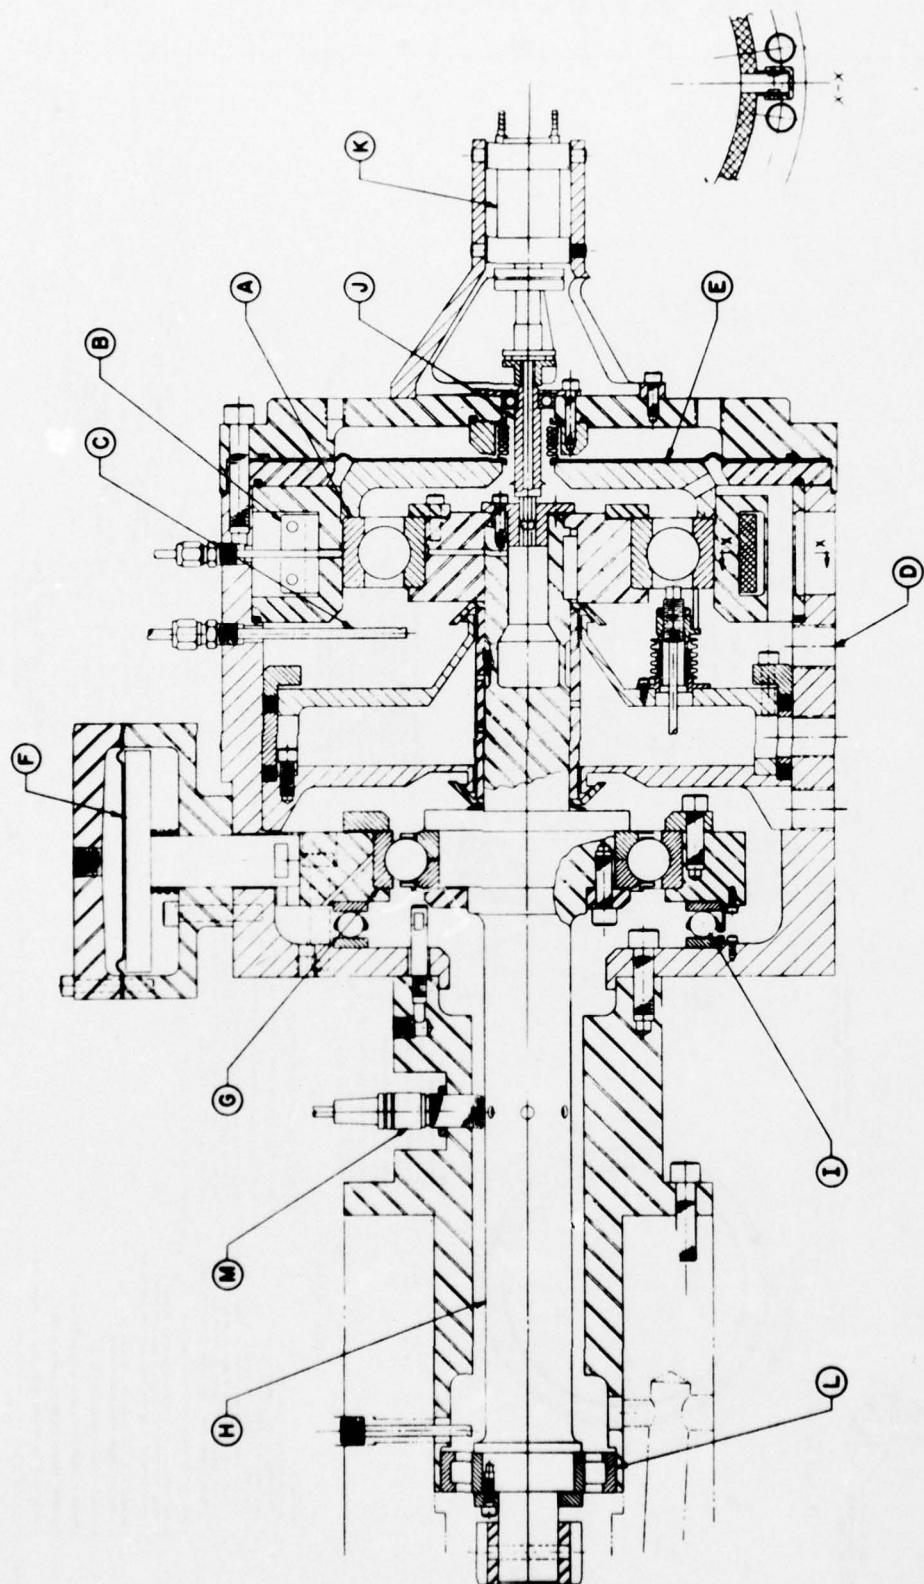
Cross Section of Rolling Element Bearing Test Machine
